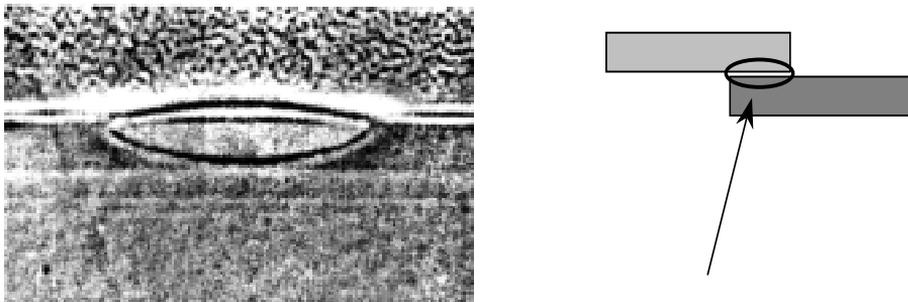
Cross section of the overlap-joint welding zone [30].
